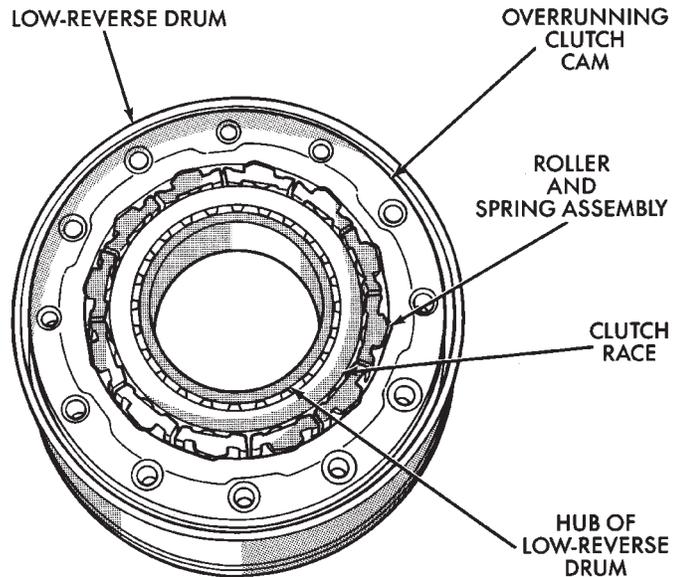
Temporary Assembly Of Clutch And Drum To Check Operation
